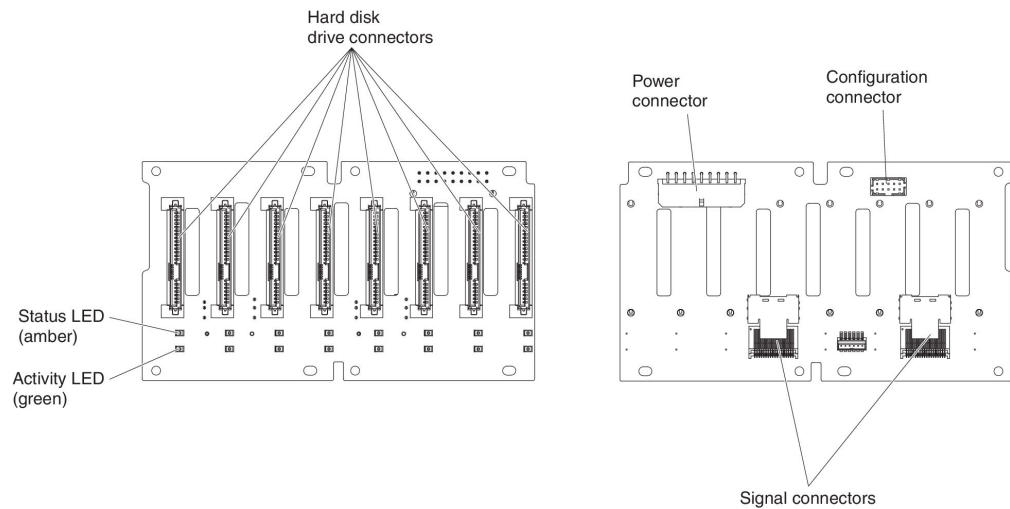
Connectors on the 2.5-inch hard disk drive backplane
